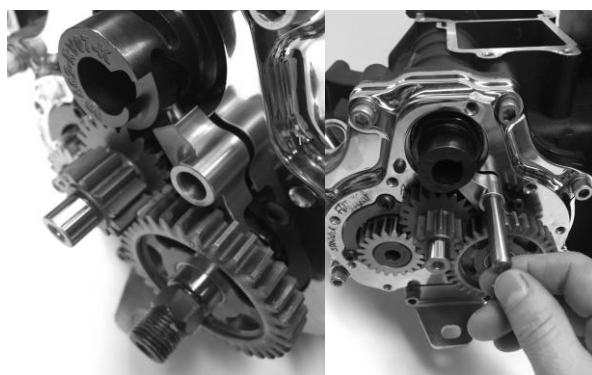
| INSTALLING THE REVERSE SHIFT FORK AND FORK ROD
